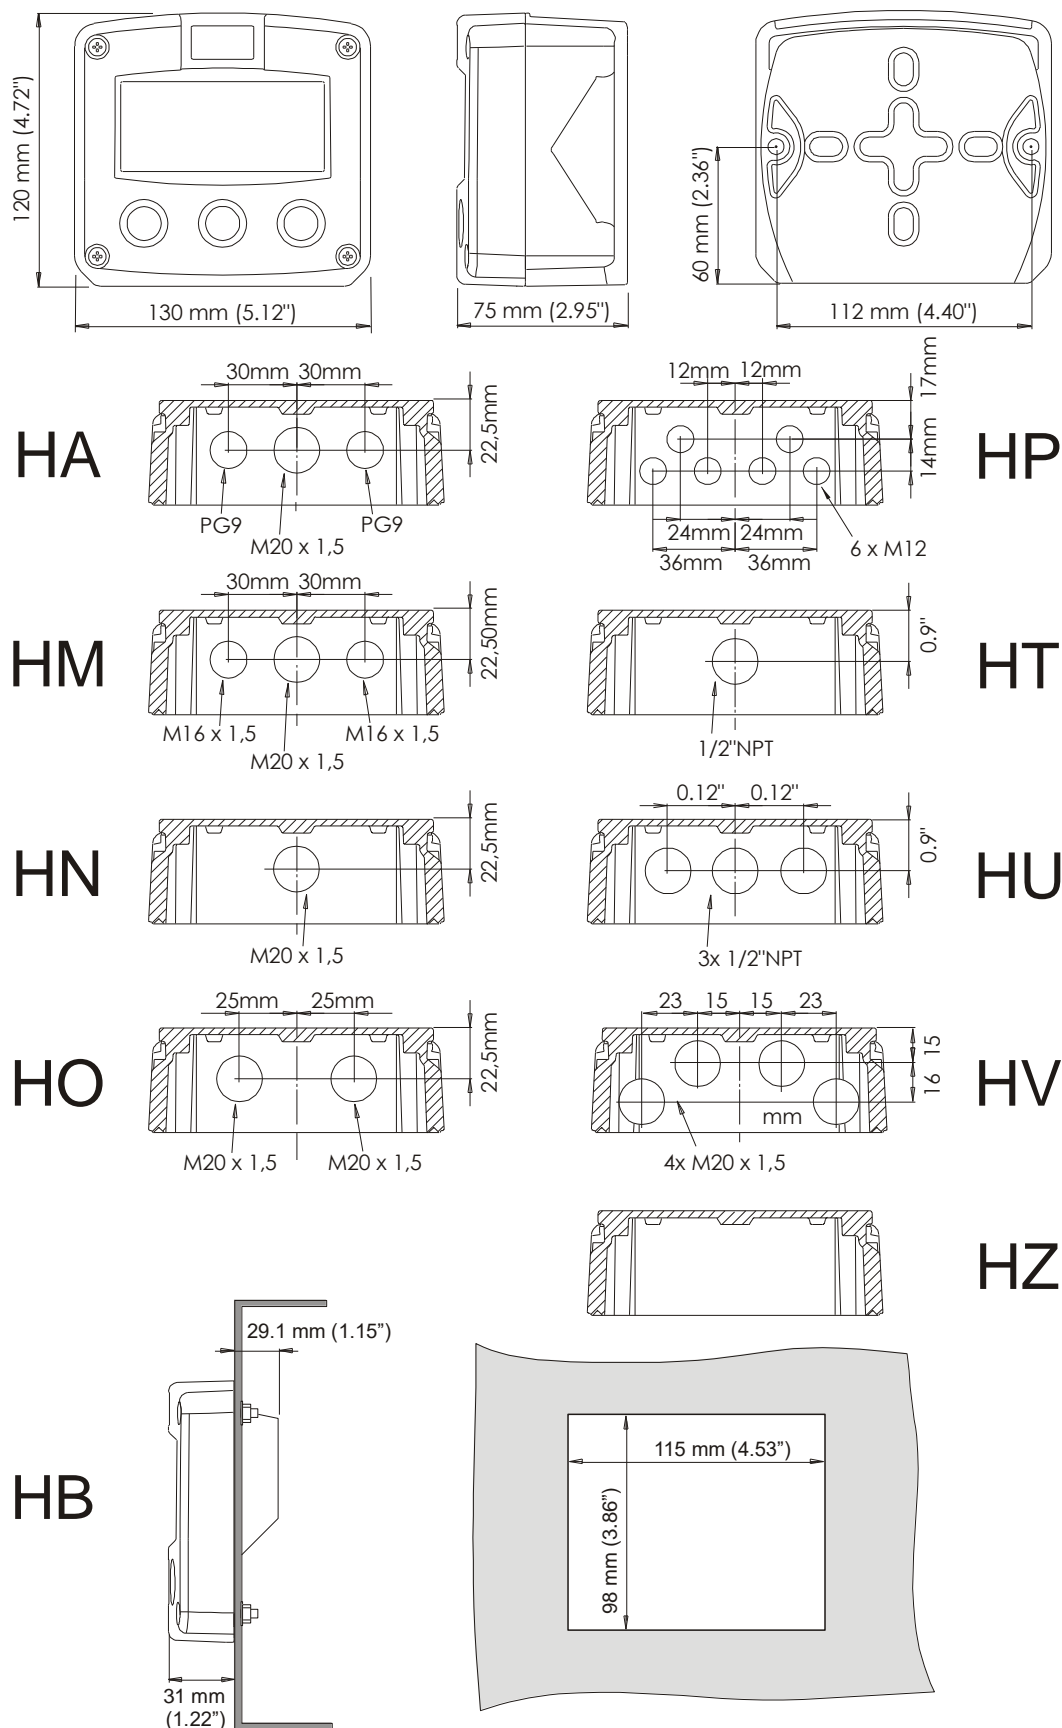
Dimensions – Aluminum and stainless steel enclosures
